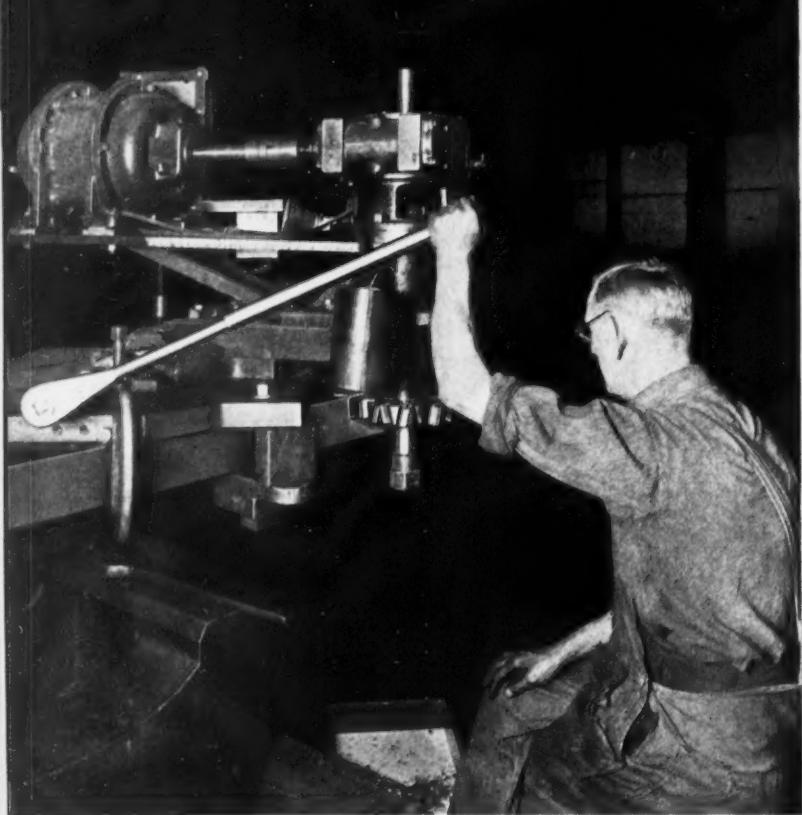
Special Machine Devised for Milling a Tapered Shoulder around the Rounded Corners of Armor Grating
